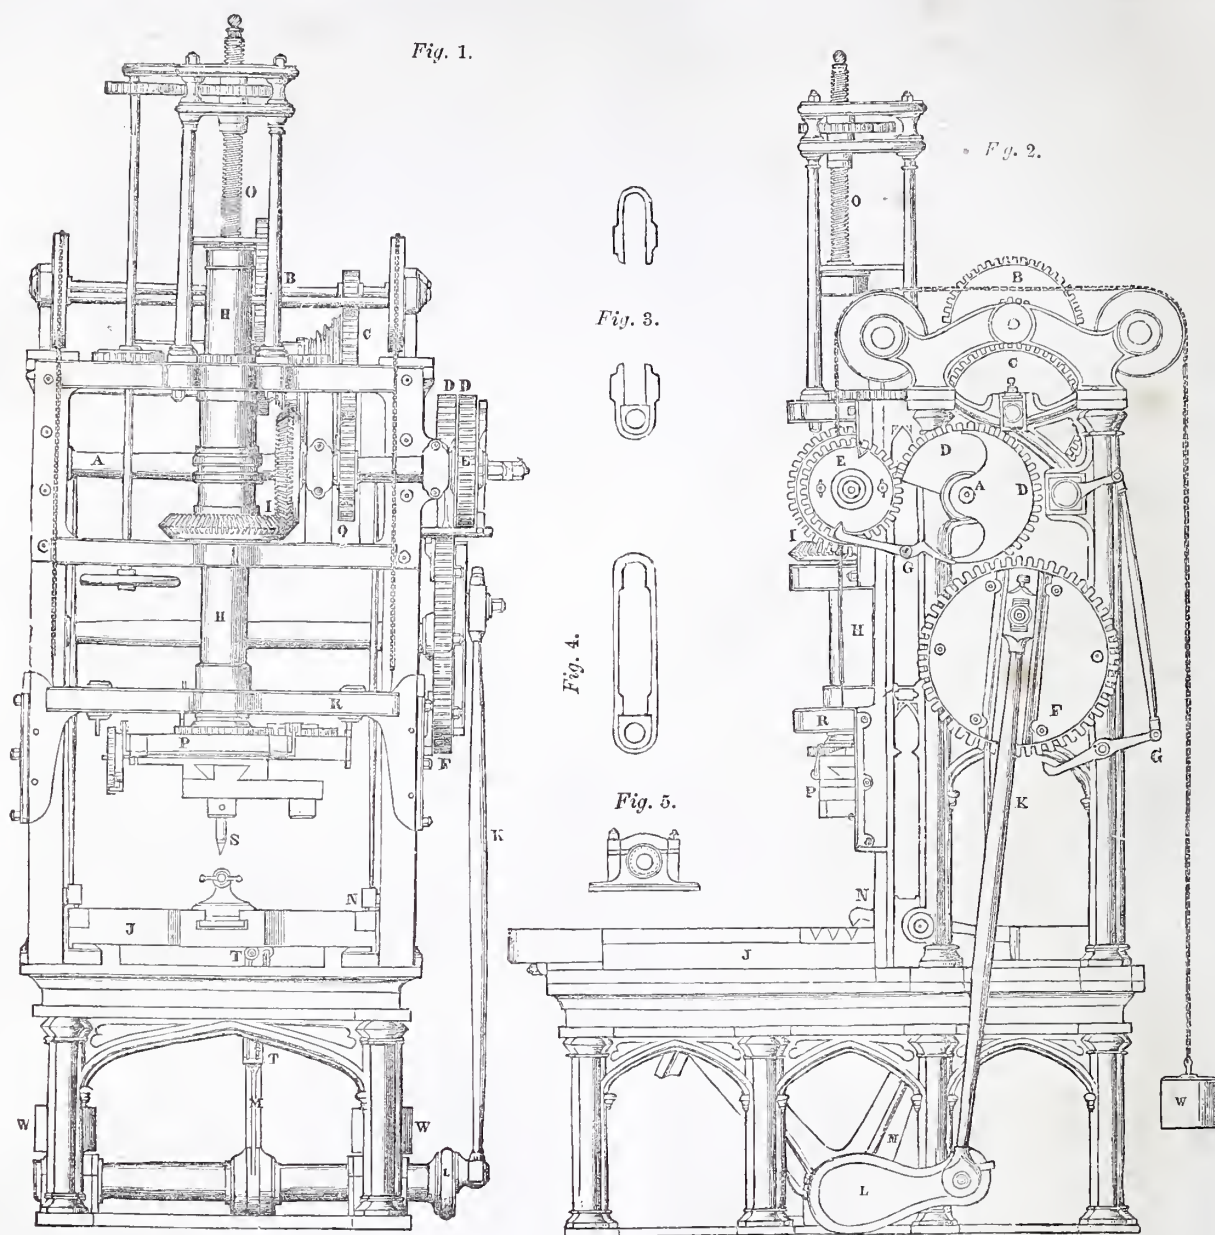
is a front elevation; fig. 2 is a side elevation. A A is a shaft driven by the double-speed gear B C, in which the driving cone is seen beside the wheel at C, which drives a wheel keyed on the shaft A, on which are also keyed two toothed sectors D D, so adjusted as to drive the wheels E F on different shafts alternately, giving them each half a revolution, these wheels in the intervals being held by the detents G G. The wheel E drives the mitre wheels I, and through them the spindle H, giving it a revolving motion, and thus doing the circular work. Diametrically across the wheel F a groove is cast, in which the bush of the connecting-rod K is adjusted to any distance from the centre, and thereby causing the table J to traverse the necessary distance by the crank L and sector M on the same shaft, connected to the table by chains, which are seen at T, fig. 1. The detent N holds the table while the circular portion of the work is being done.
